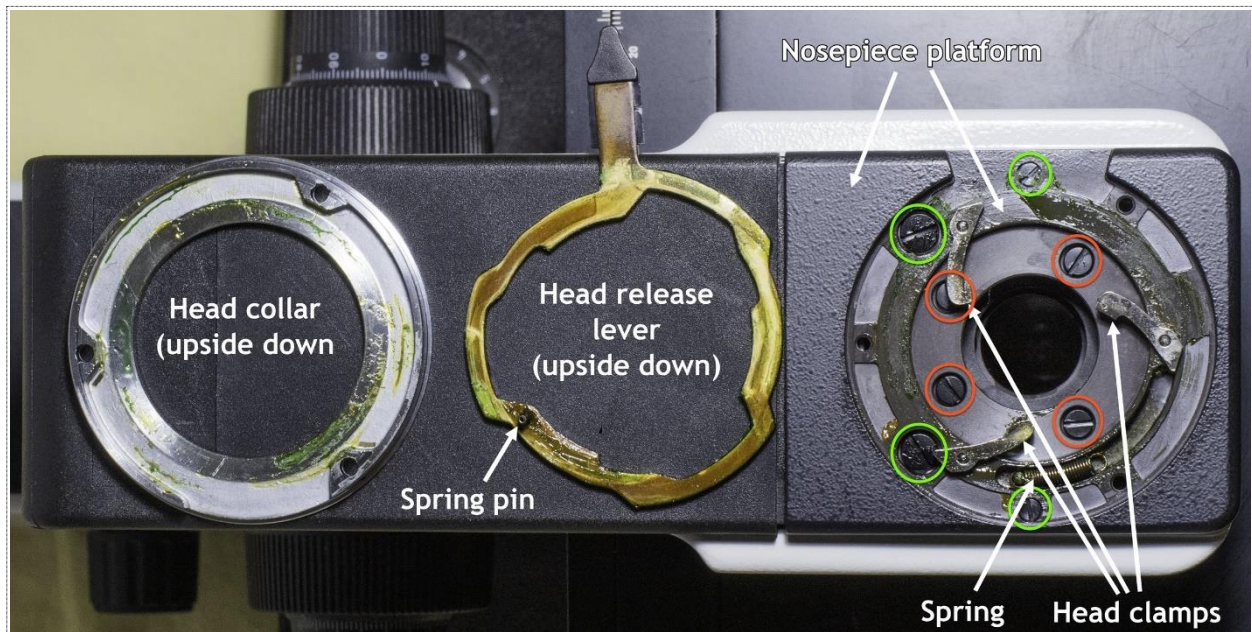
View down on the head mount, with the head release mechanism disassembled.
